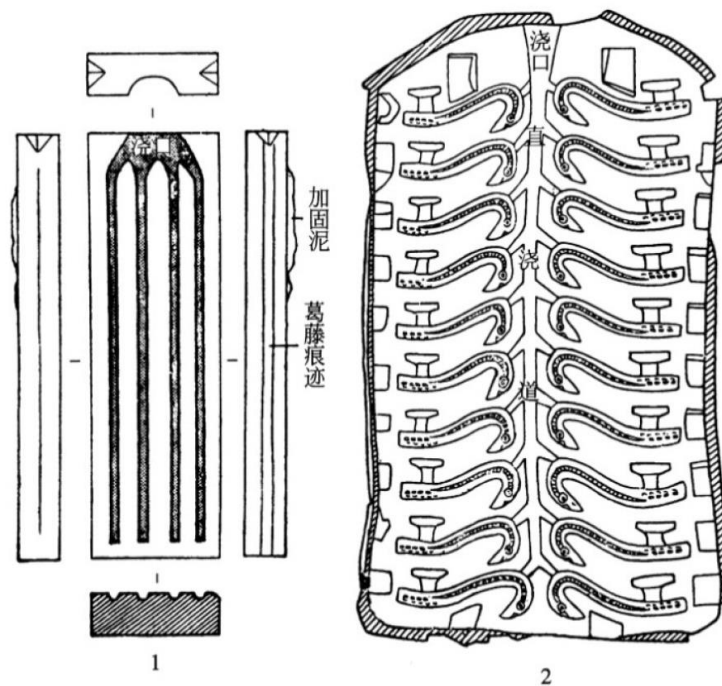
Diagram of casting moulds with multiple cavities from Yangcheng casting site in Dengfeng, Henan province (Bai 2004). 1: casting mould for iron bars; 2: casting mould with multiple cavities for belt hooks.
